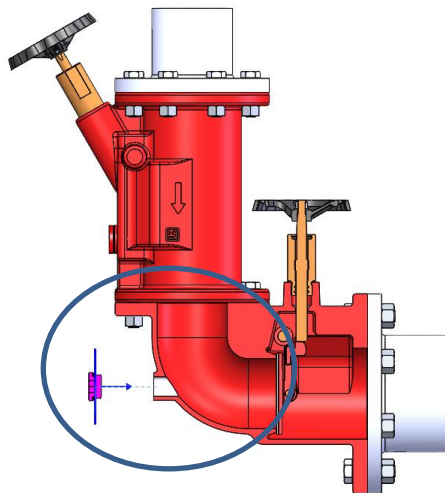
Top part of angled storm valve with removed G7/8" plug.
